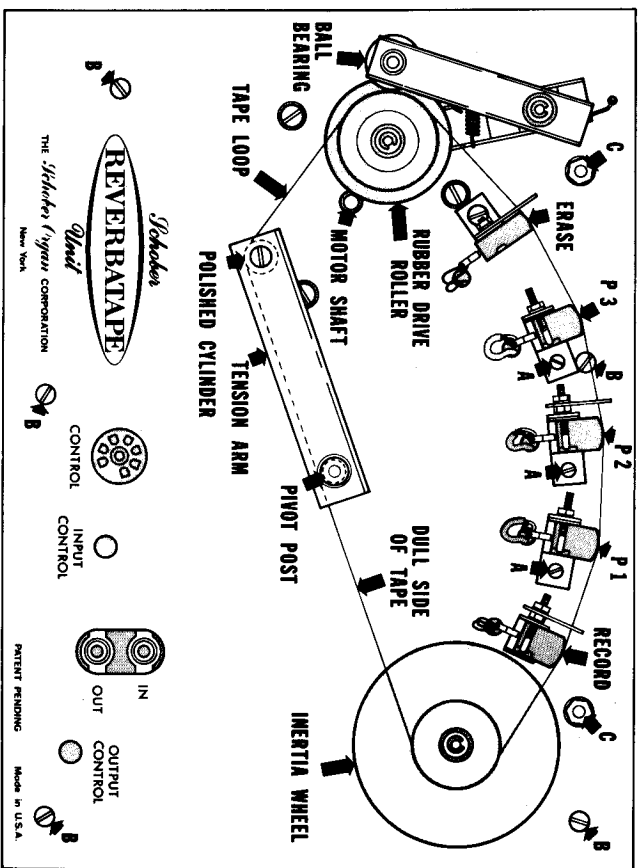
Details of the Reverbatape mechanism. B: Screws holding printed board inside chassis. C: Screws for external head cover. P1, P2, P3: Playback heads. A: Head azimuth adjustments. Entire tension arm swings freely from pivot post to supply tape tension.
